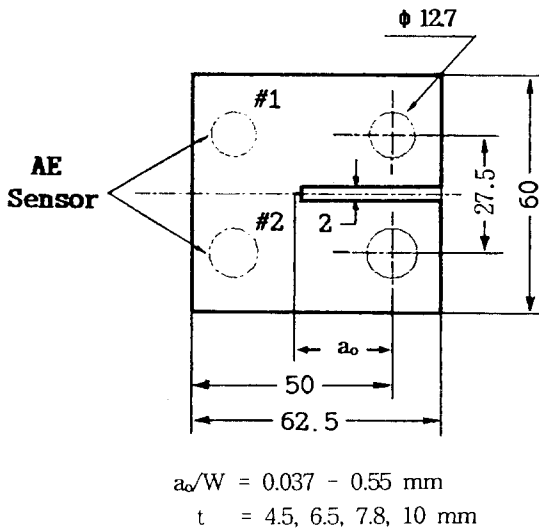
Dimensions of compact tension specimen ; all dimensions of mm
